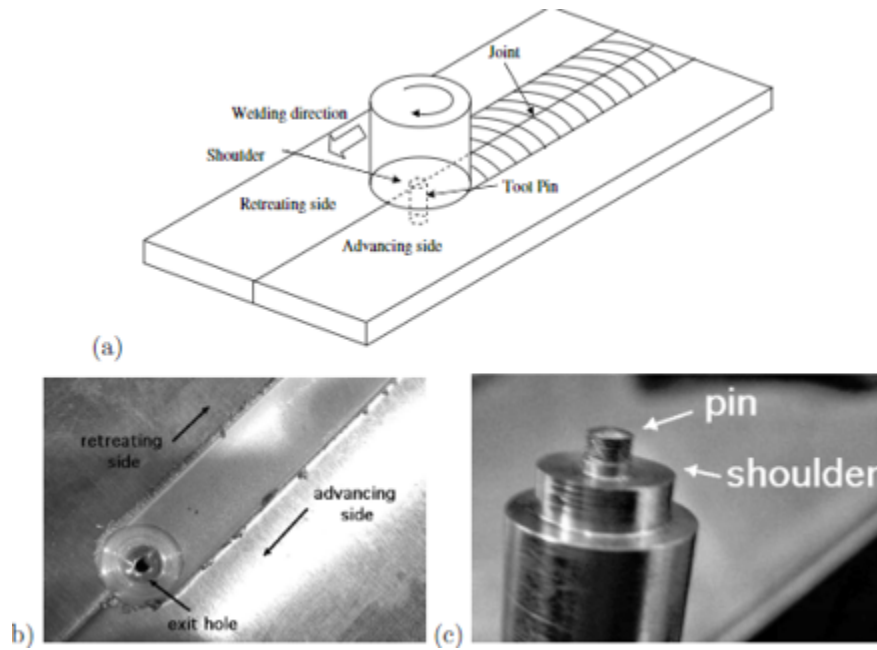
(a) Schematic illustration of the FSW process, (b) an FS weld between two abutting aluminium sheets, (c) FSW tool [38].
